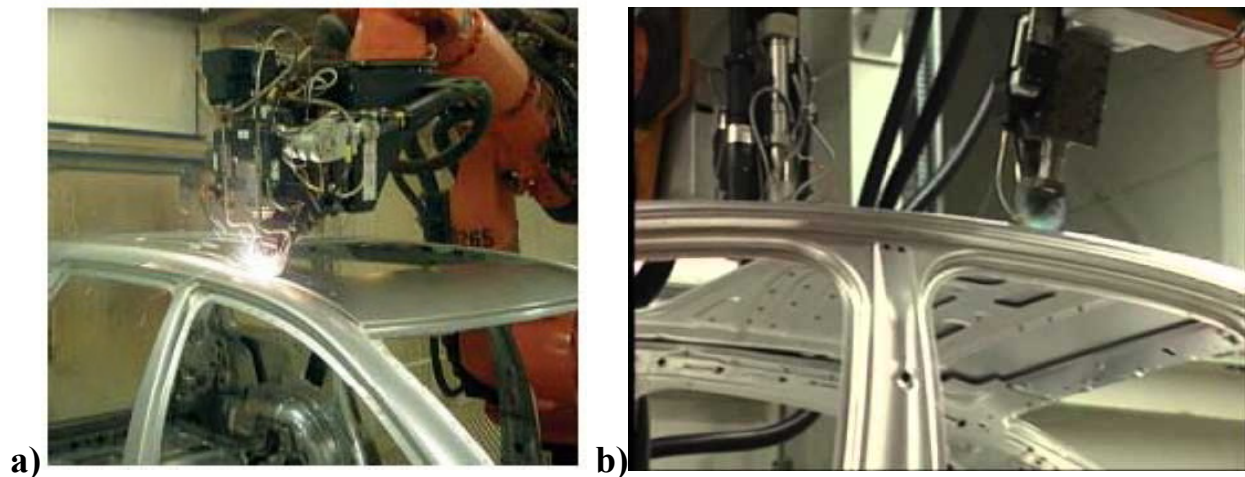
Laser welding of the roof of a Volvo XC 90 car with simultaneous squeezing of the sheets with a roller in front of the laser beam (a) using a Permanova Lasersystem AB laser welding head (b) [2].
